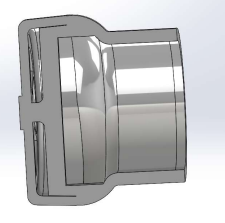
Section-view of speaking valve design iteration SV-2 (support bar is a quarter of the length of the original valve design) modeled in CAD using SolidWorks
